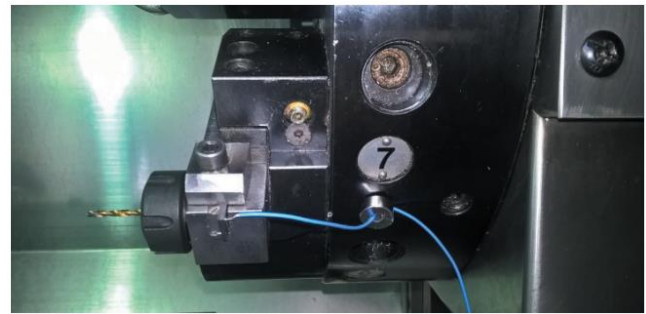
Thermocouple placed in tool - need to attach additional probe cover
